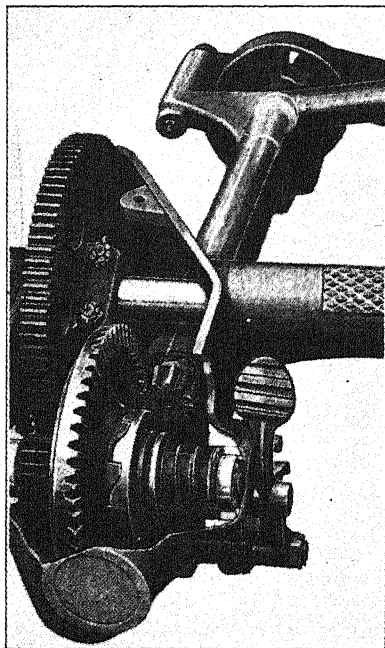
Spur gears, bevel gears, clutch, and countershaft.
